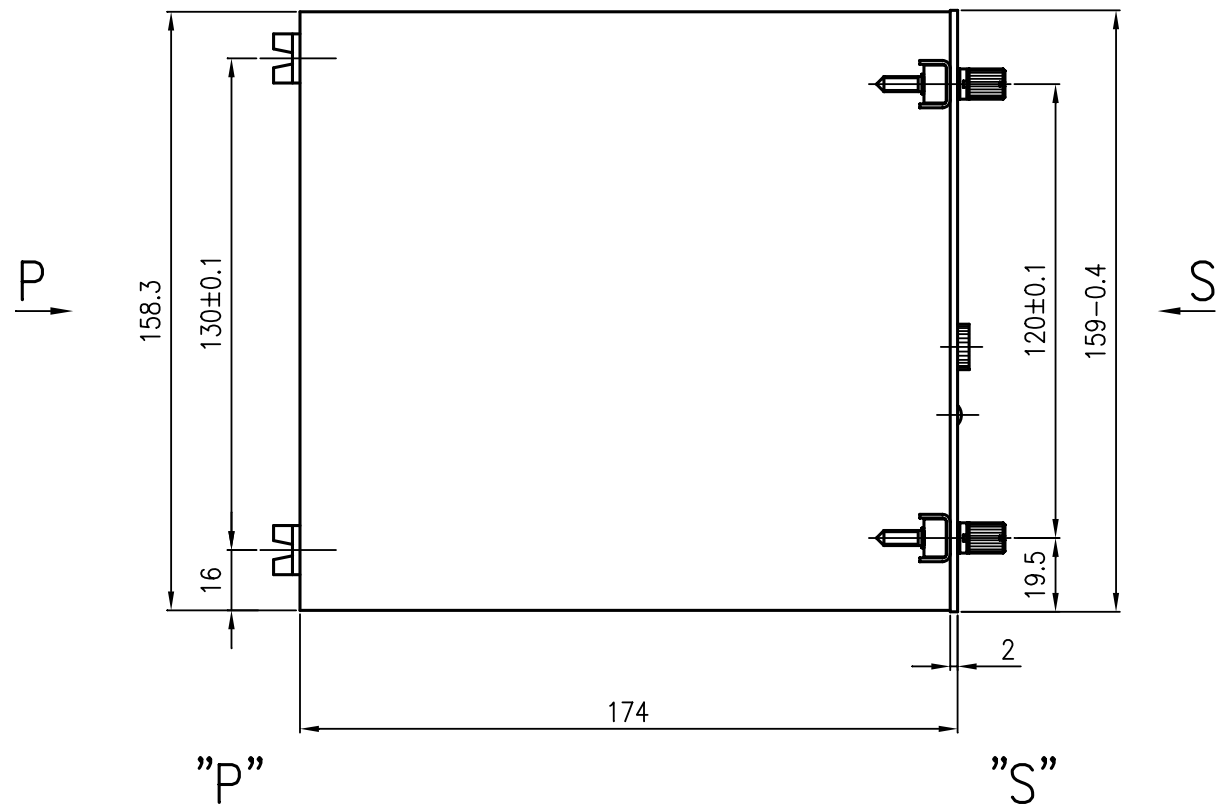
Dimensional drawing of slide-in units of controllers, type 511 21 and 511 25
